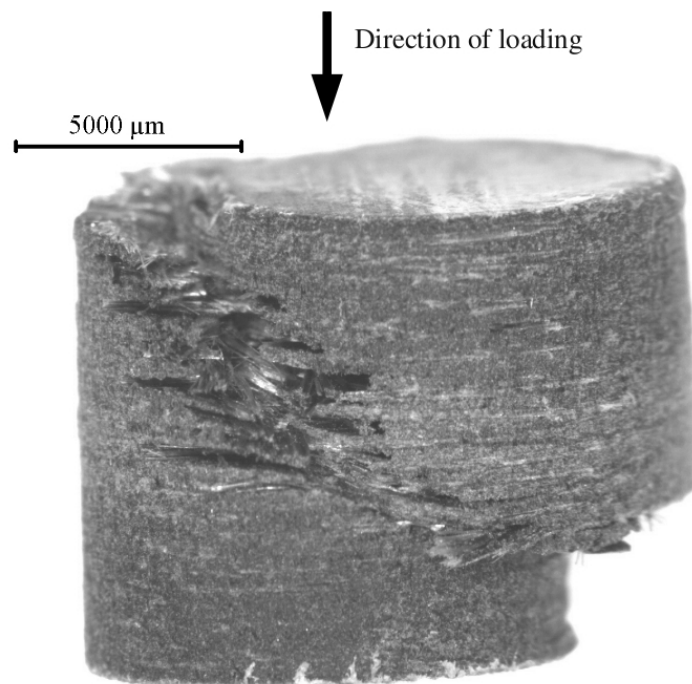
Photograph of failed GFPP specimen following through thickness compression, showing macroscopic shear
